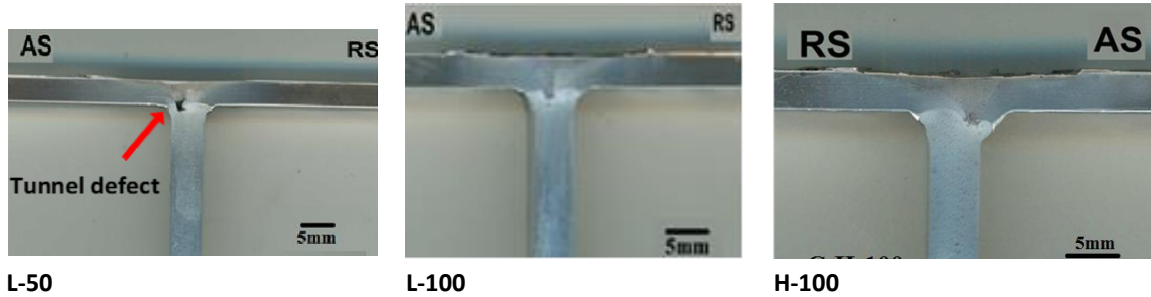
Macrostructures of joints welded at different welding conditions and using only the third tool
